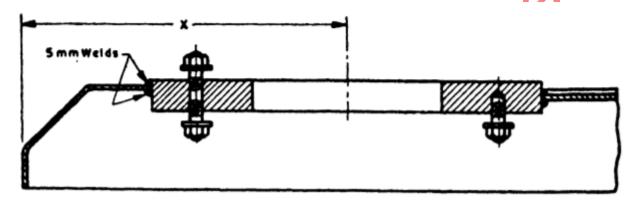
Double pad welded to tank plate (pads for 50 mm pip and under, sealing welds omitted)
